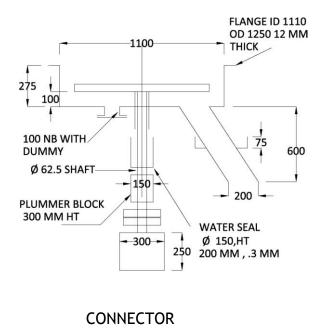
Engineering drawing of the Vertical carbonizer with coconut shell dryer
